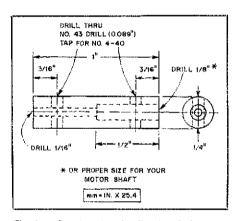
Construction details of a shaft coupler for use with the drill press. The diameter of the motor shaft hole may have to be adjusted to suit the motor you are using.
